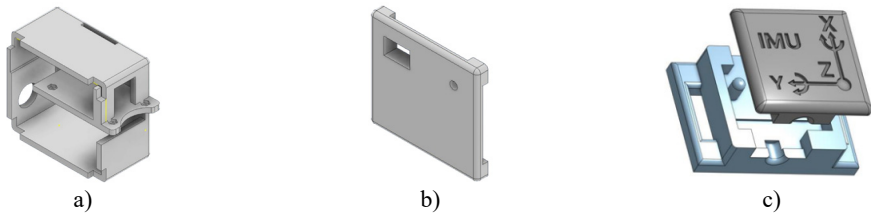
CAD model of the wearable device: a) main enclosure; b) cover; c) IMU module housing
